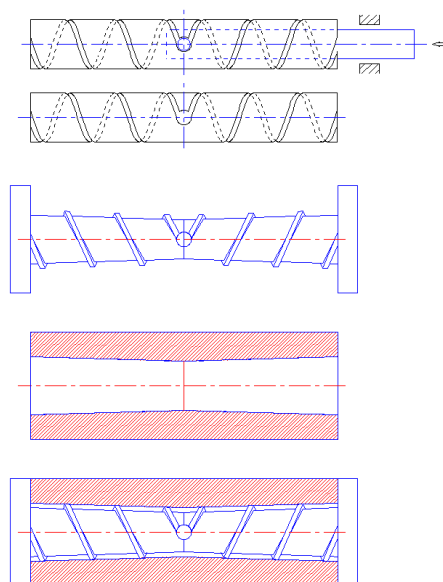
Sun roller and its dies – core dies, cavity die and the tool after assembly
